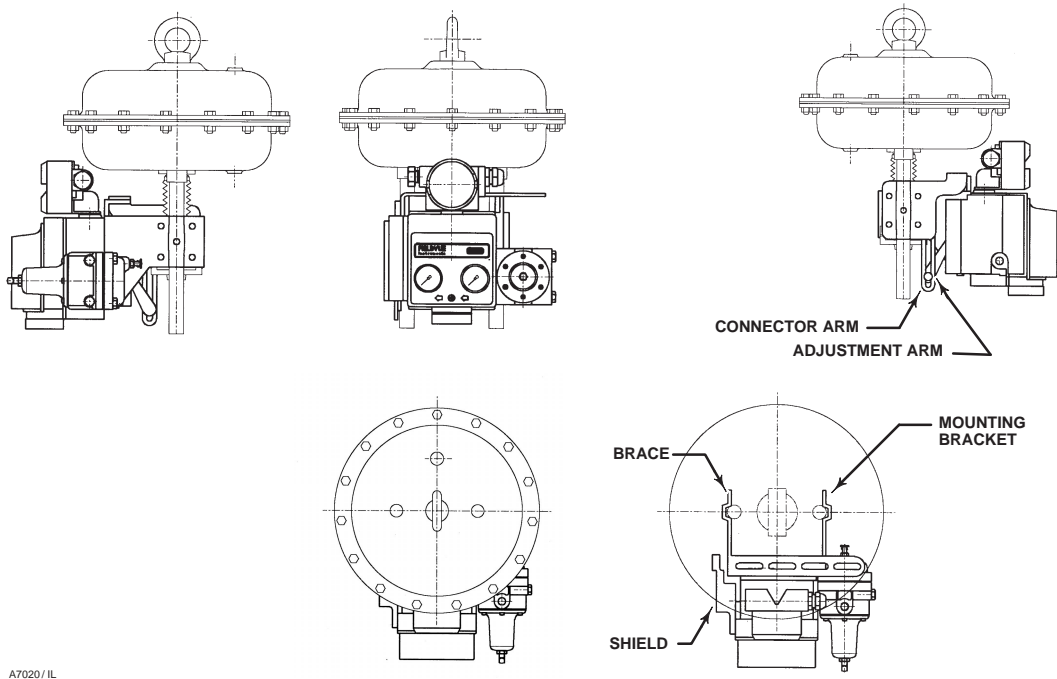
Type DVC5010 Digital Valve Controller with Integrally Mounted Filter Regulator Yoke-Mounted on Gulde Pneumatic Actuator Model GA
